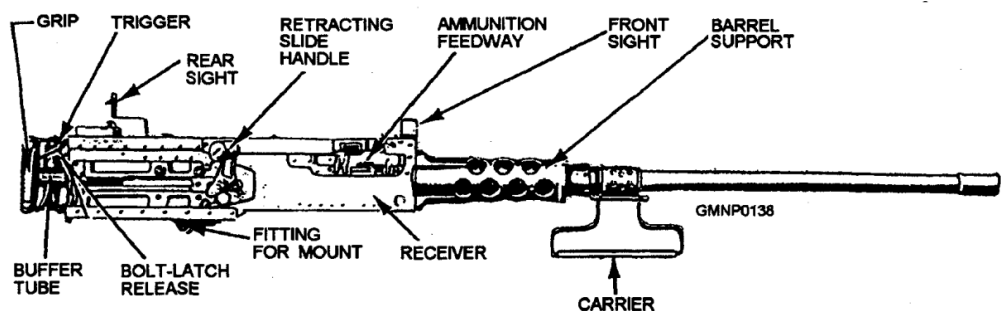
12.7 mm Caliber M2 Machine Gun [1]
